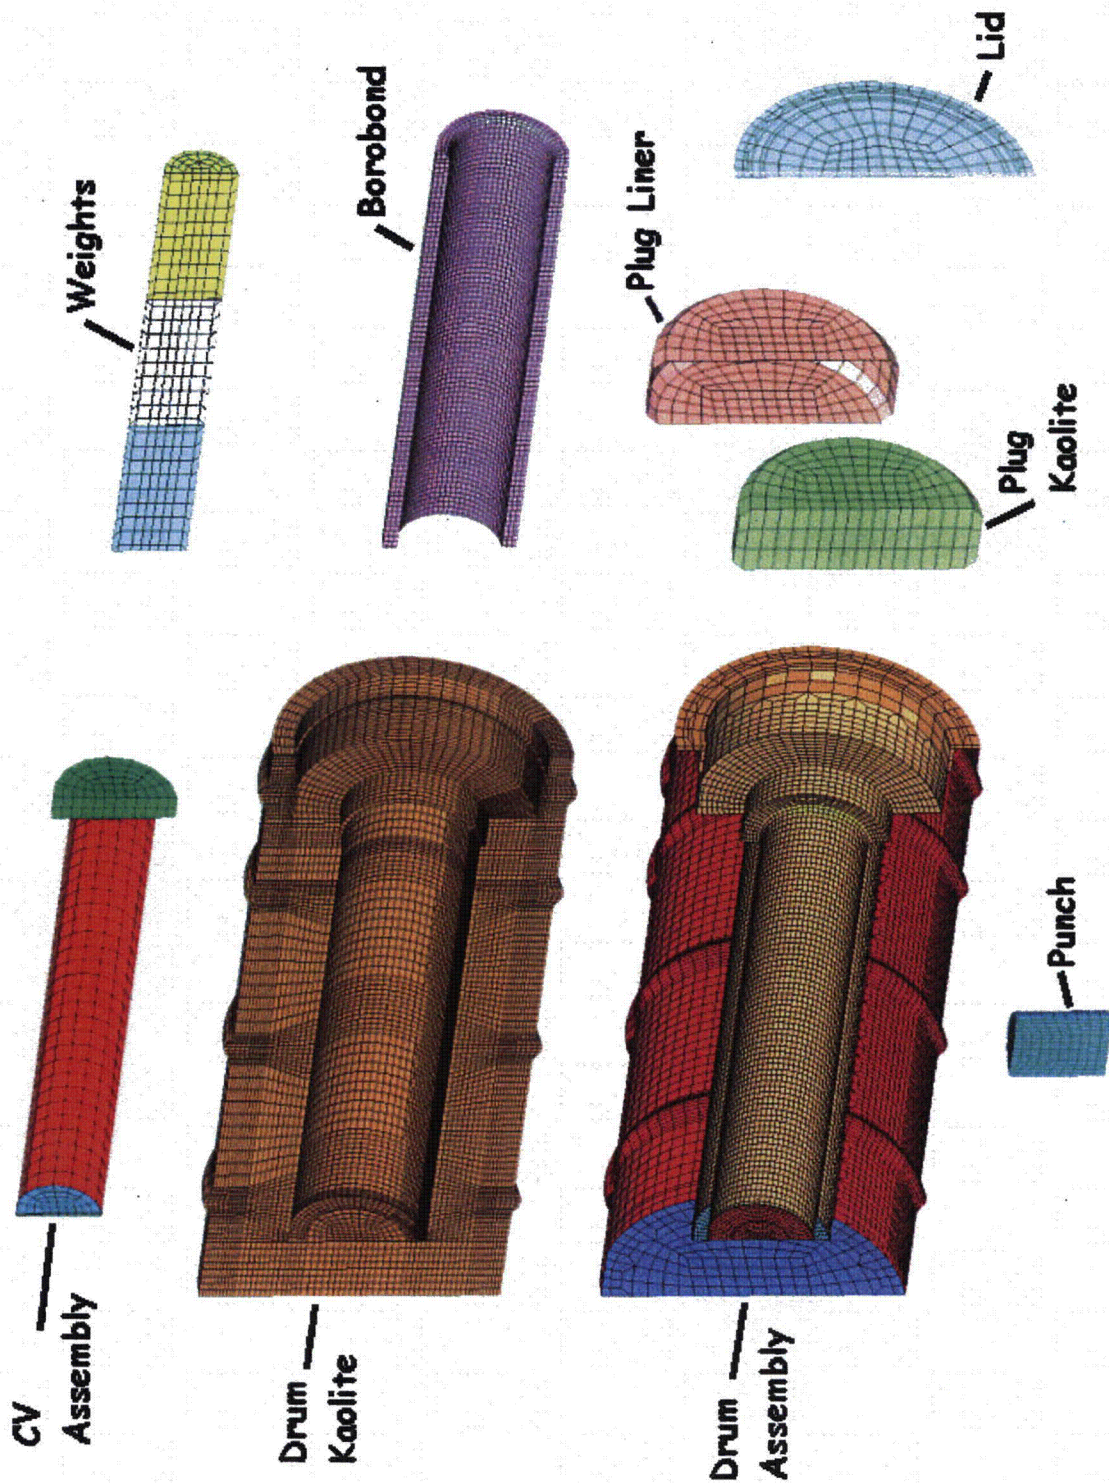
Exploded View of the ES-3100 Simple Model
